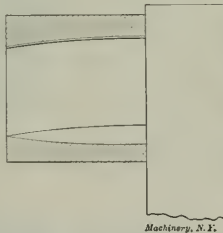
Section showing the Bending of a Crankpin and Consequent Unequal Wear of the Box.
